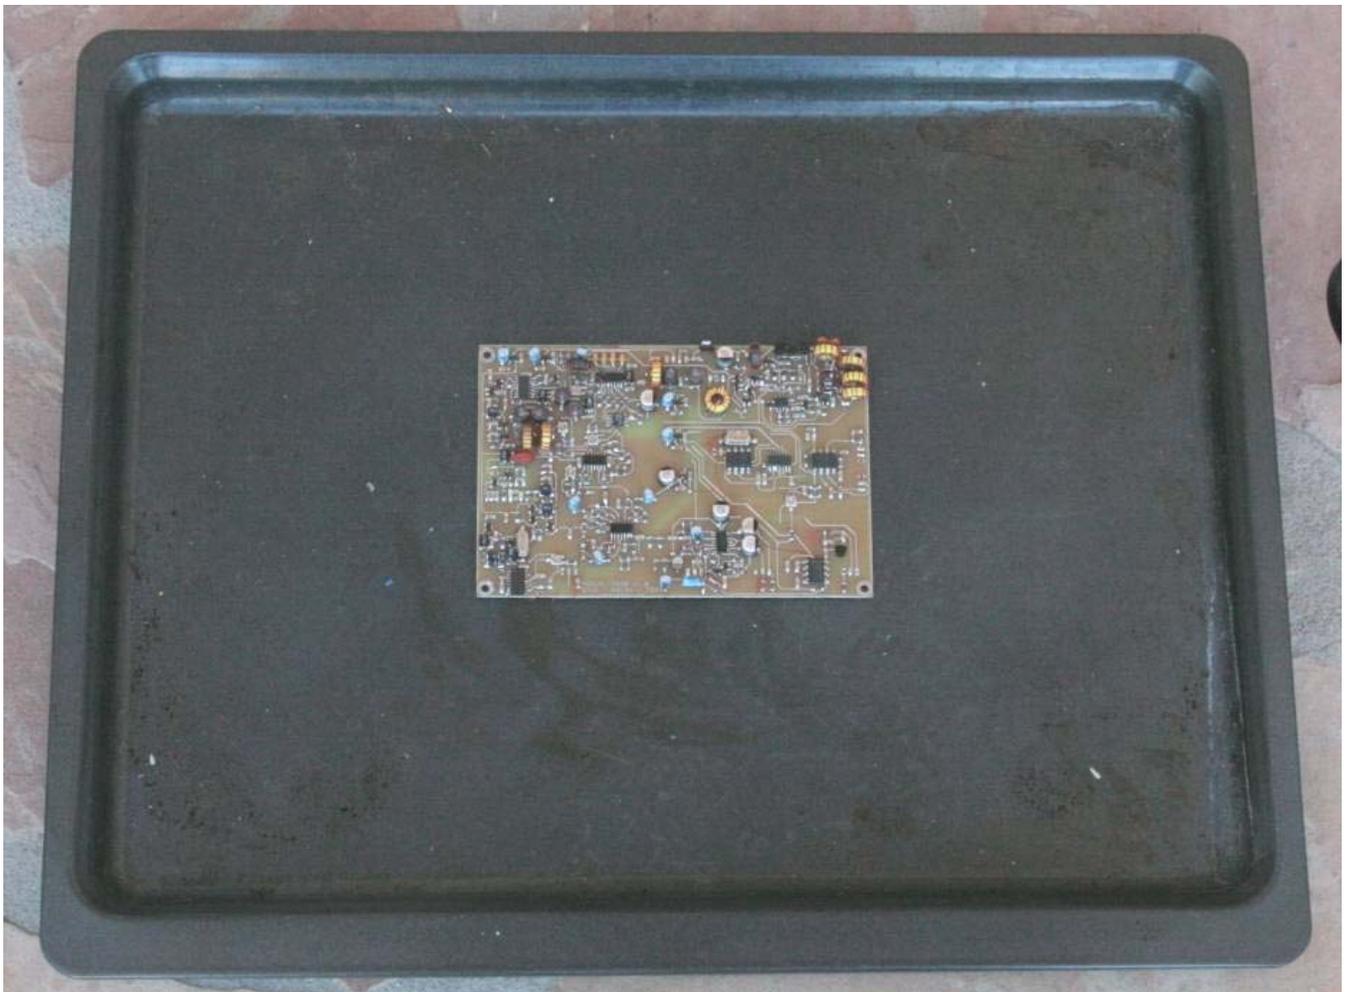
Working over an oversized cookie sheet is highly recommended to catch stray surface mounted parts
